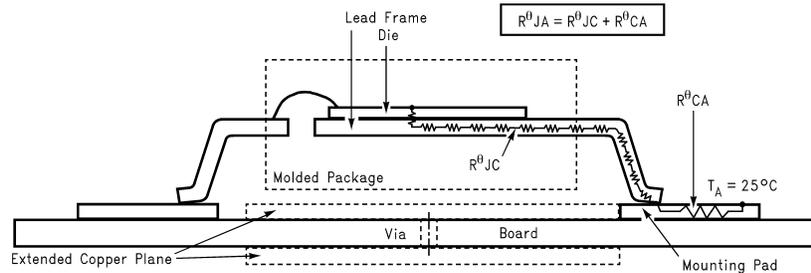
Cross-Sectional View of Integrated Circuit Mounted on a Printed Circuit Board.
